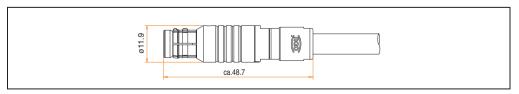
Plug dimensions (ODU Minisnap) - voltage supply cable 5CAPWR.0xxx-20
